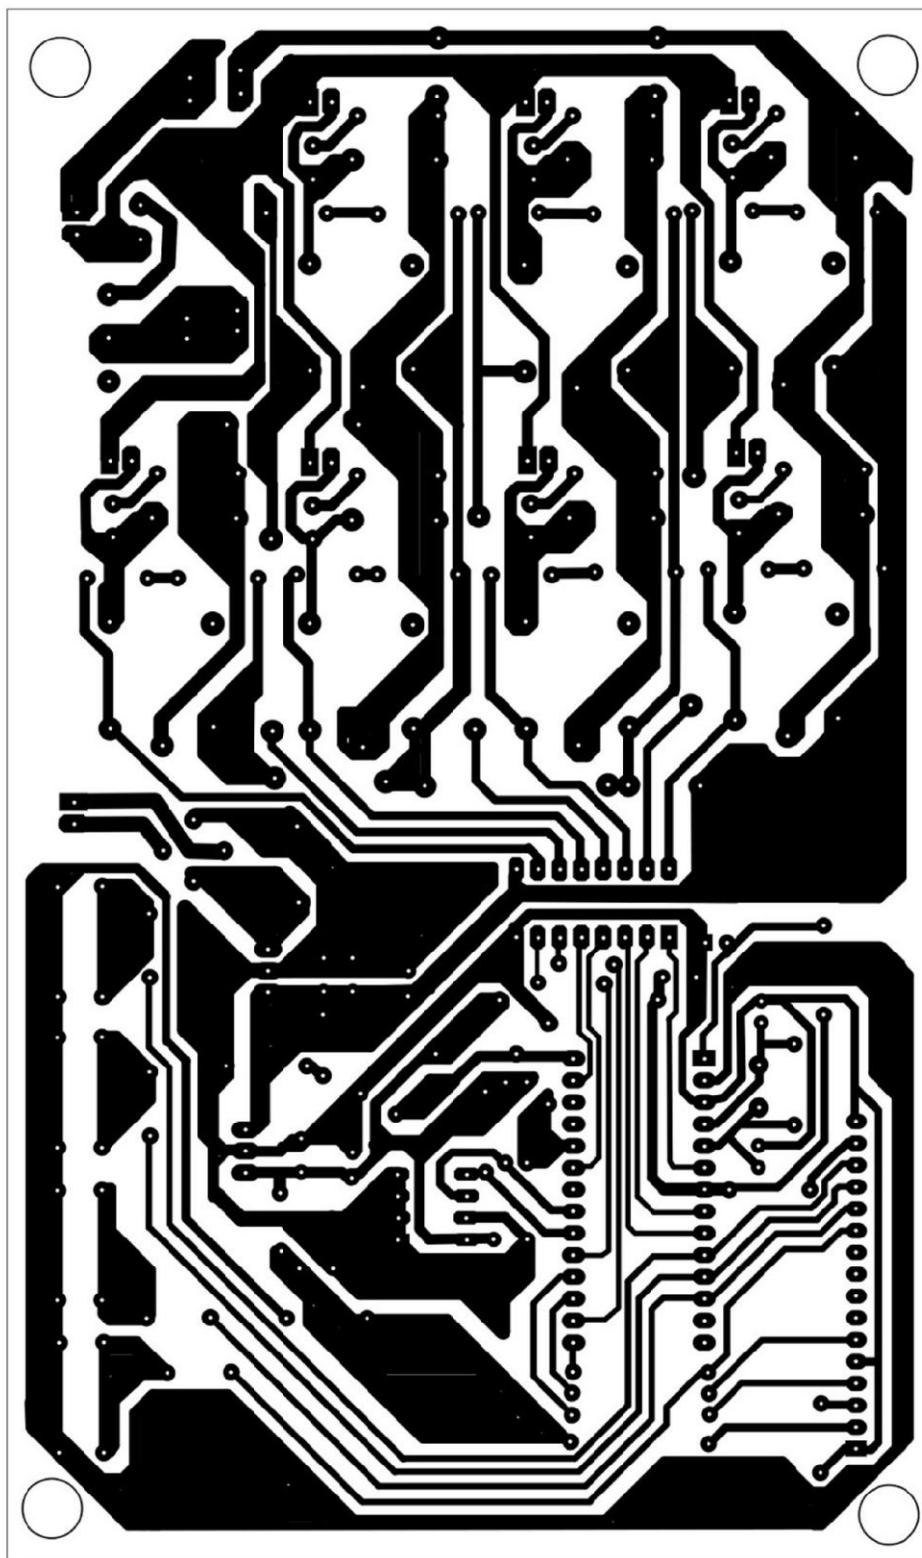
An actual-size, single-side PCB layout for the beverage vending machine controller
